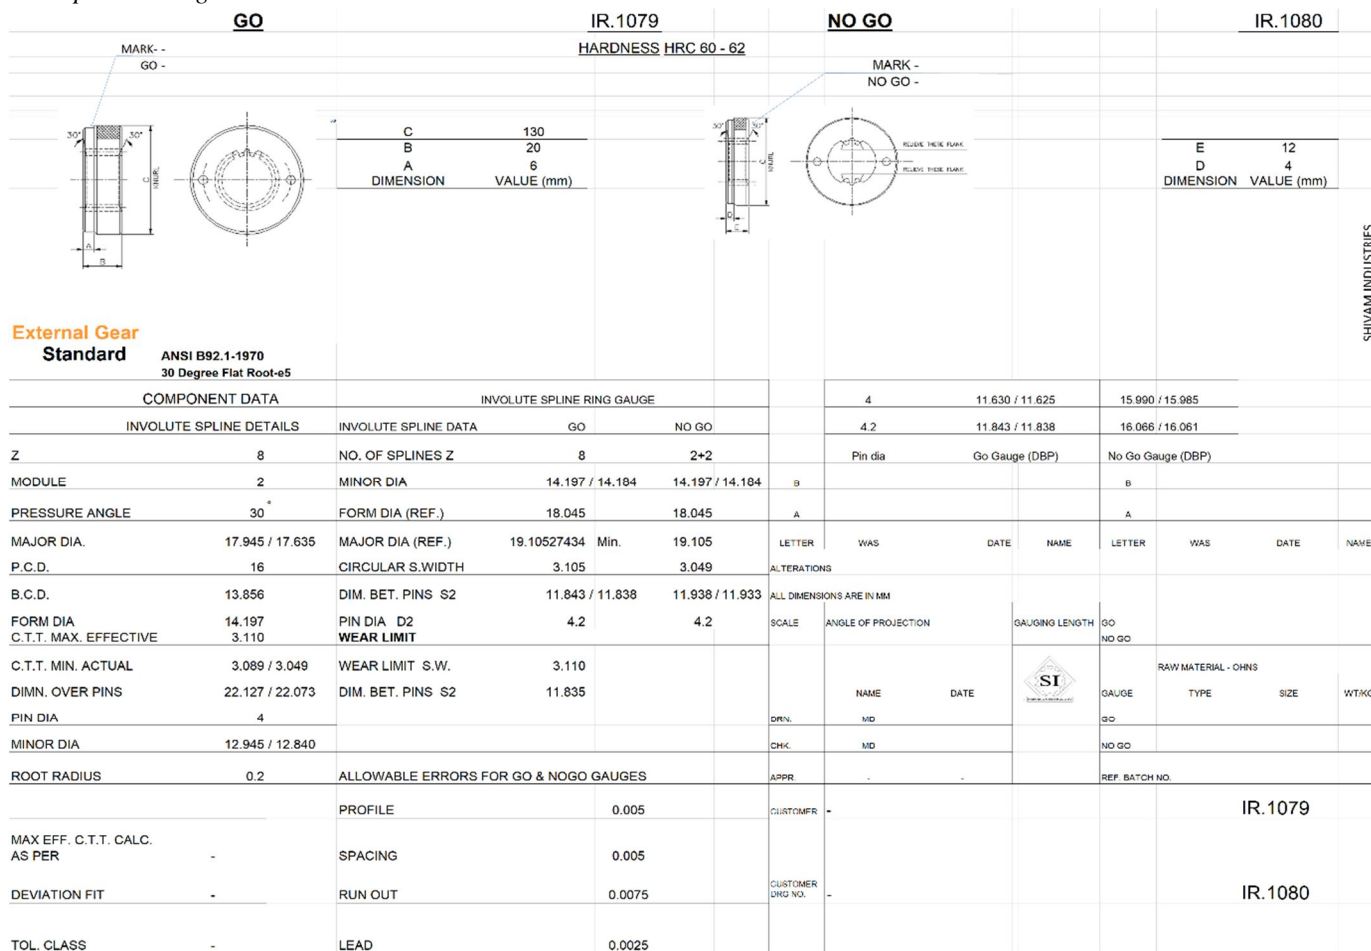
Final Output Drawing for Spur Gear and Go, No-go Gauge
